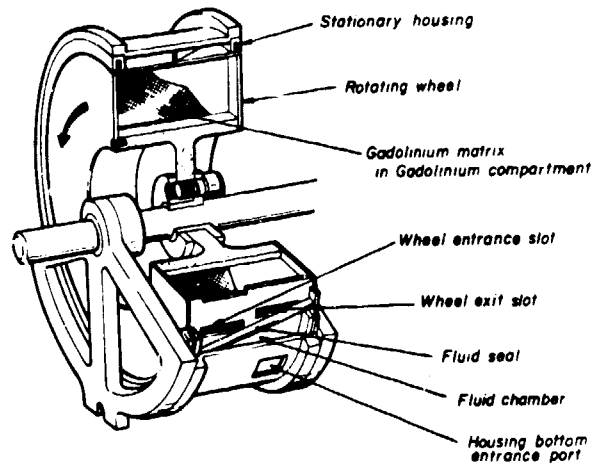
Cutaway of wheel and housing showing orifices in compartments, seals, and mounting.
